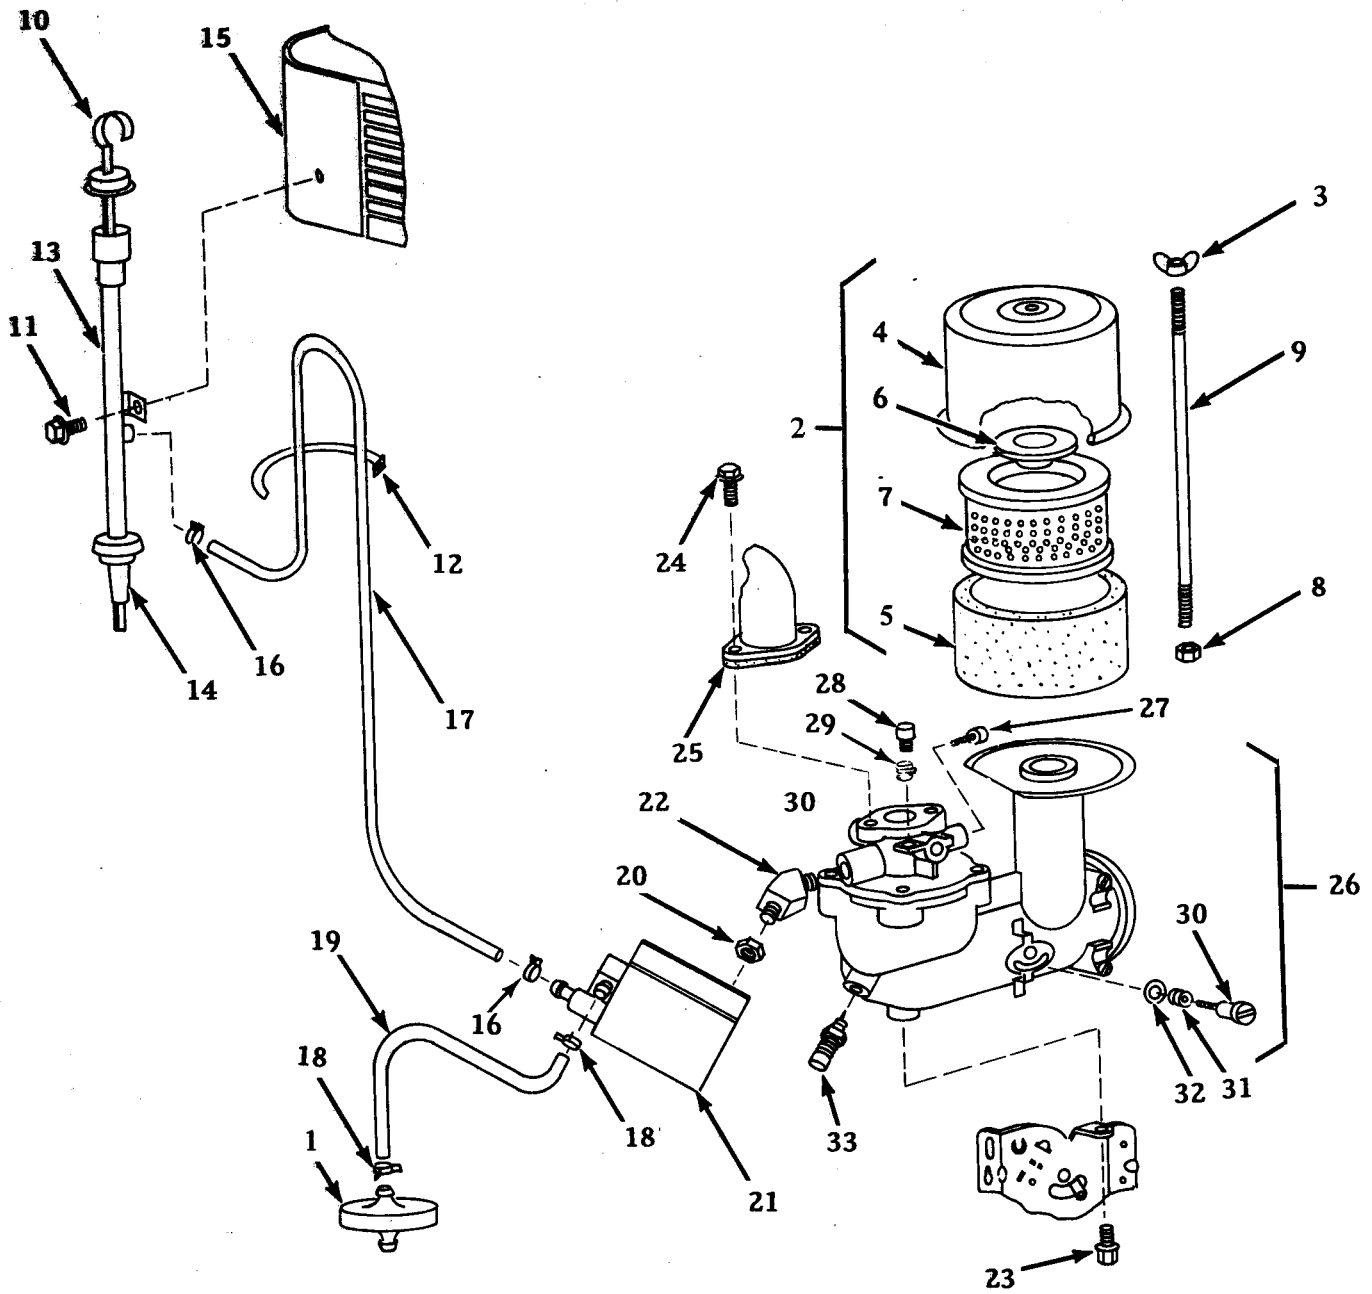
Fuel Filter, Air Cleaner Assembly, Lubrication System, Carburetor and Fuel Pump
